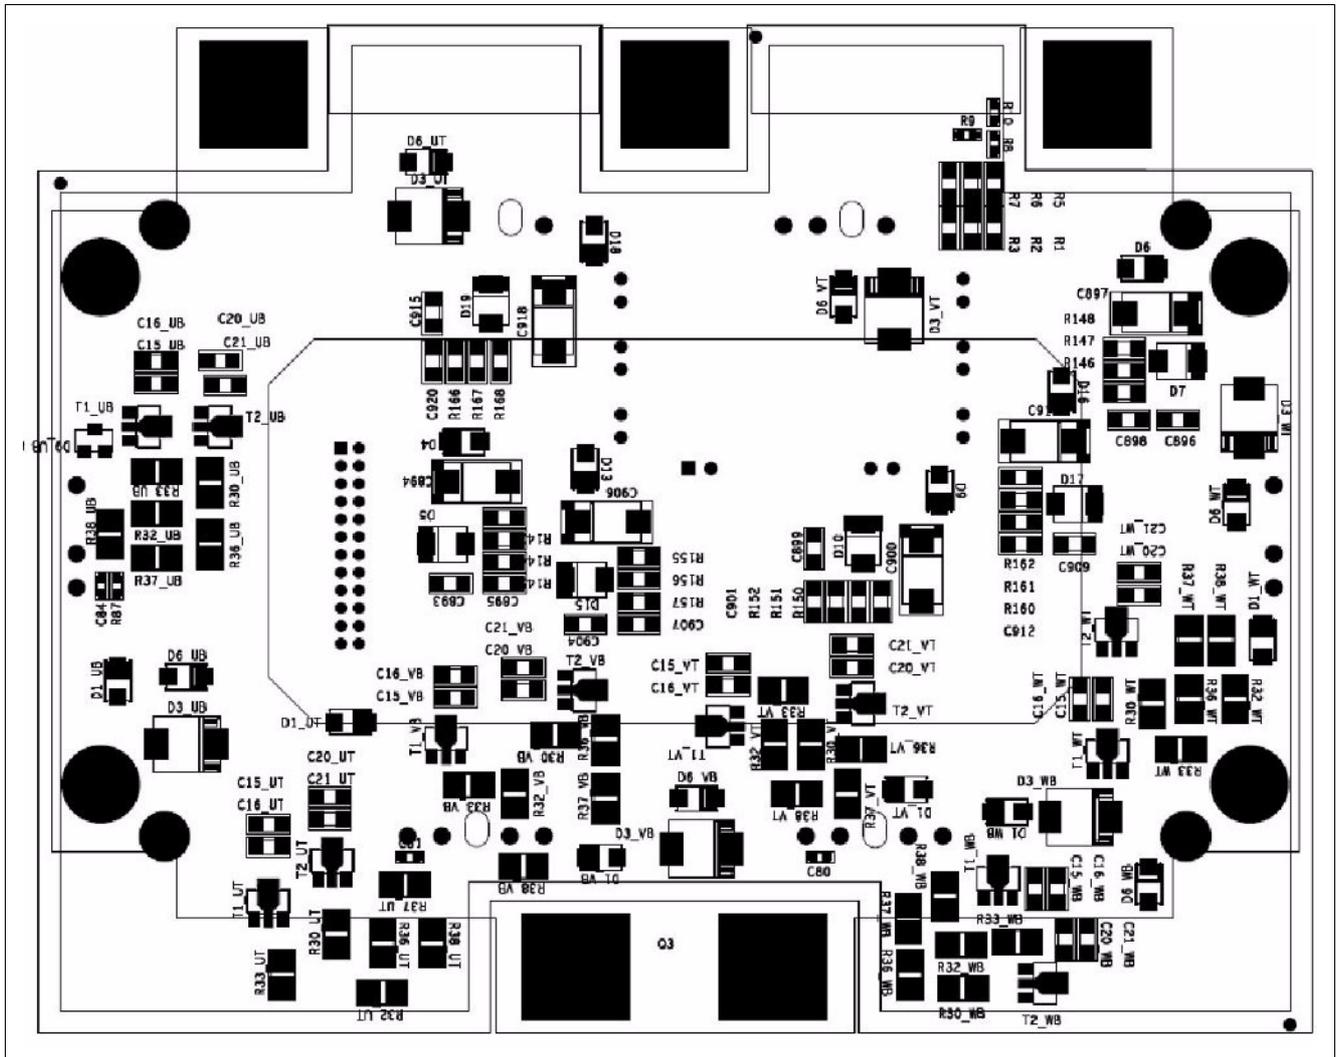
Assembly Drawing of the Driver Board (Bottom)
